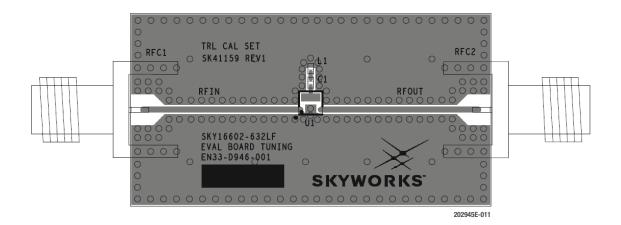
SKY16602-632LF Evaluation Board Assembly Diagram (Tuned Circuit)
